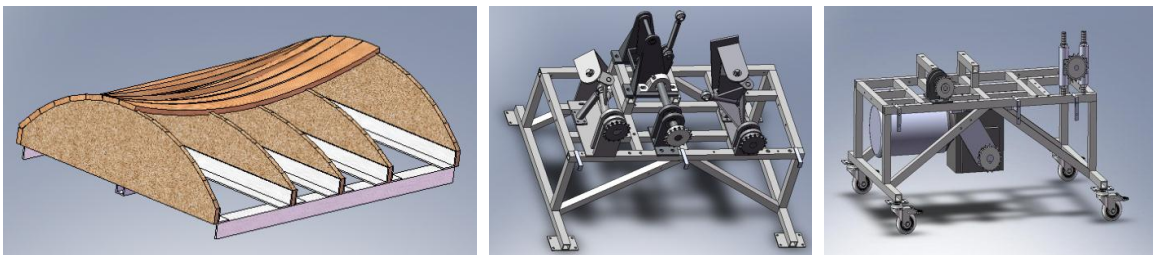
Seat Structure (Left), Mechanism Mounting (Center), Power Transmission Mounting (Right)
